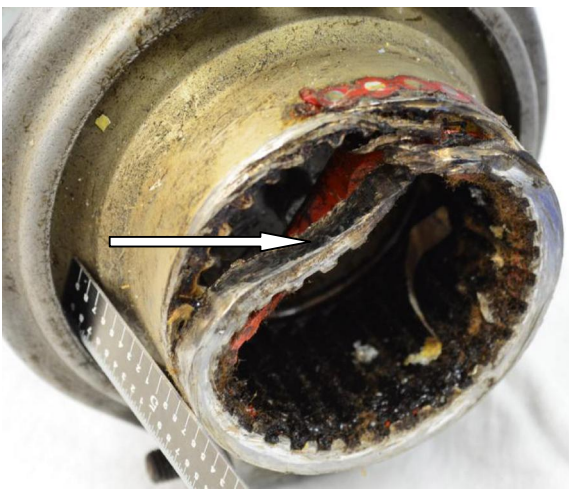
below shows the fractured tail rotor driveshaft, located just forward of the 42° intermediate gearbox, as received in the laboratory. Aft of the overload fracture was a twist in the driveshaft. The direction of twist indicated a sudden rotational stoppage in the drivetrain aft of the twist. It was reported that the tail rotor blades did not reveal any damage that could have contributed to the sudden stoppage. A photo of the wreckage showed that the female coupling attached to the fractured driveshaft was wedged between its mating male coupling attached to the 42° intermediate gearbox and the driveshaft enclosure. Damage observed on the female coupling and male coupling teeth confirmed this scenario after the female coupling was disengaged. This occurred after the left-hand aft control cable fractured and before the main rotor blade struck the tail boom.
